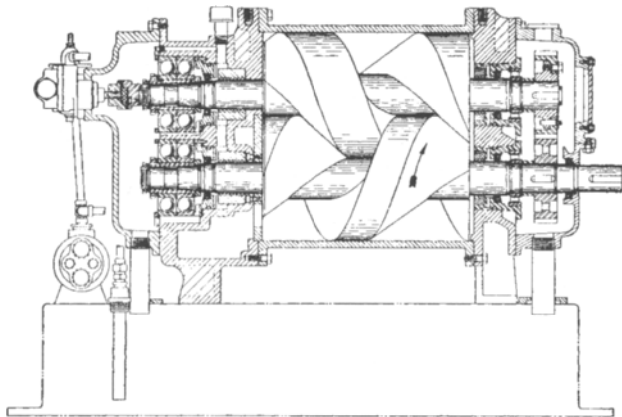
A. A typical cross-section showing the spiral screw rotors, lubrication system, and other details of internal construction. (Used by permission: ©1961. Roots Division, Dresser Industries, Inc.)
